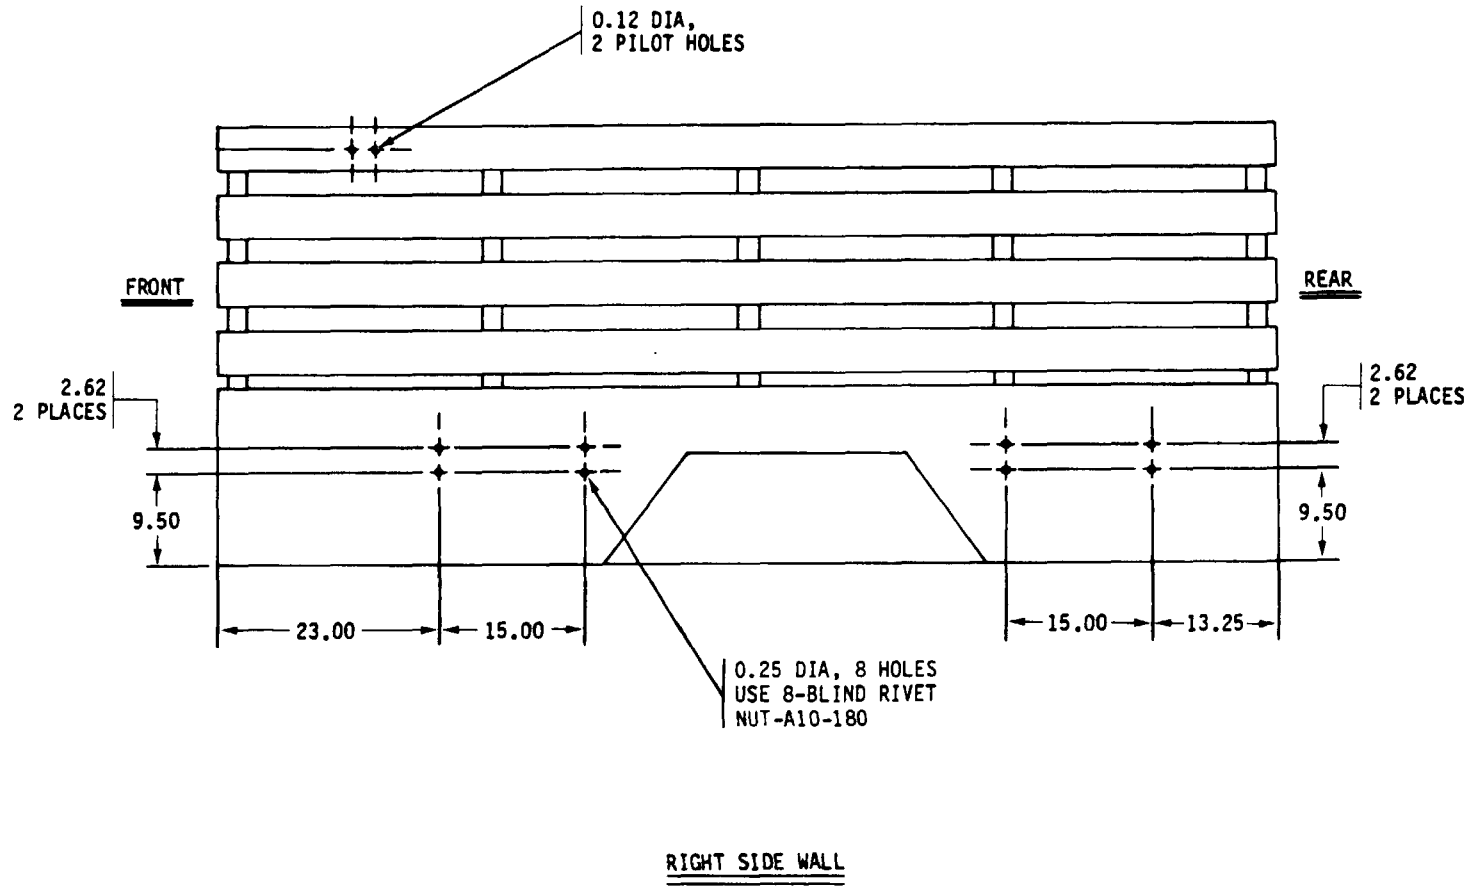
Hole Dimensions for Blind Rivet Nuts and Strap Loops, Unit 5, M105A2, Right Side Wall.
